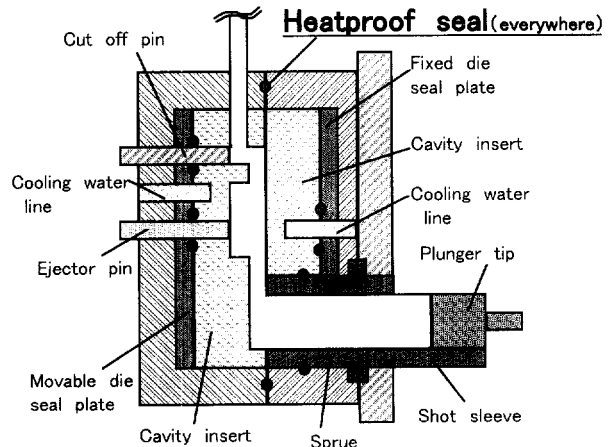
Schematic illustration of die apparatus of vacuum die casting system with cut off pin
